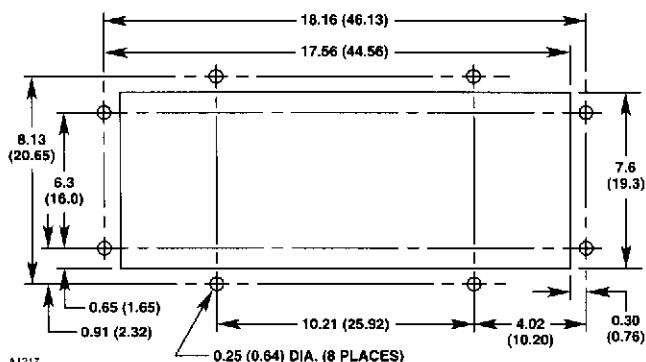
Four Unit 19 Inch Panel Mount Cutout Dimensions in Inches (Centimeters)
